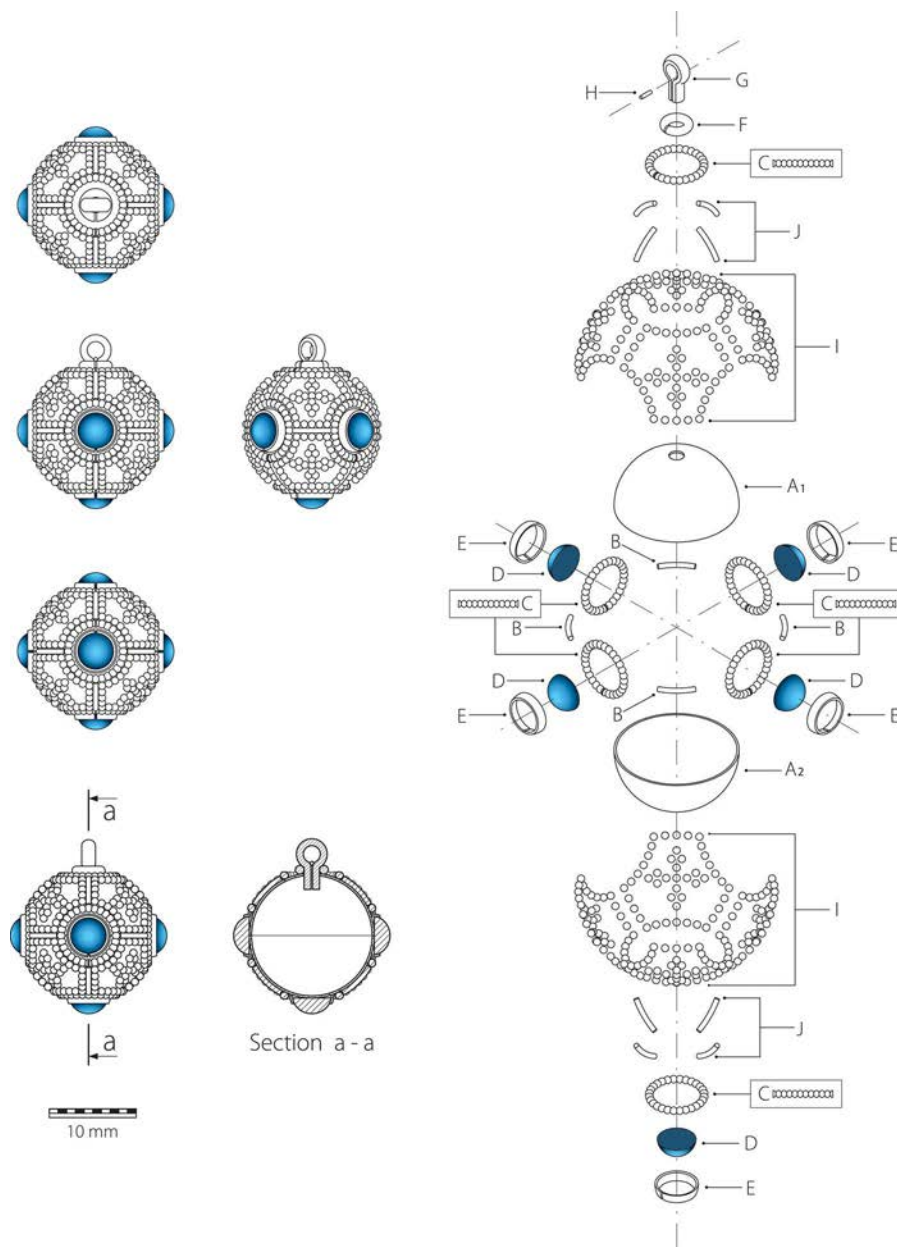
Gombik 53-14: exploded view showing the different components: A₁ upper hemisphere; A₂ lower hemisphere; B wires; C beaded wires; D glass cabochons; E bezels; F ring; G loop; H wire fragment; I granules; J wires (drawing G. Plítková).
